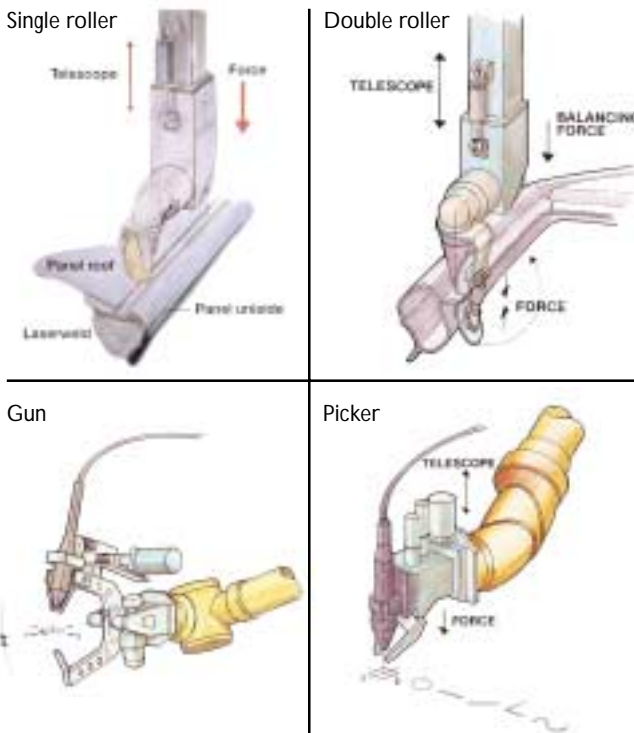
Welding heads based on PRD and PCD principles. The single-roller configuration is used to weld the Volvo S80, S70 and 850 roof.
